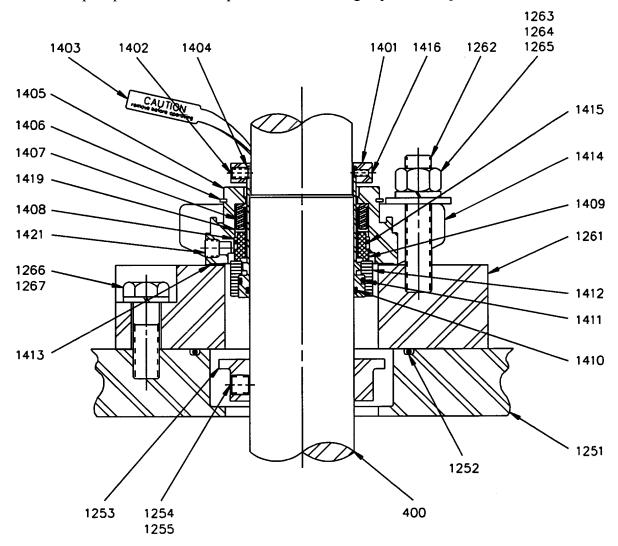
Model GTNC, Chesterton 155 Single Mechanical Seal 2" and 2-1/2" Shaft
